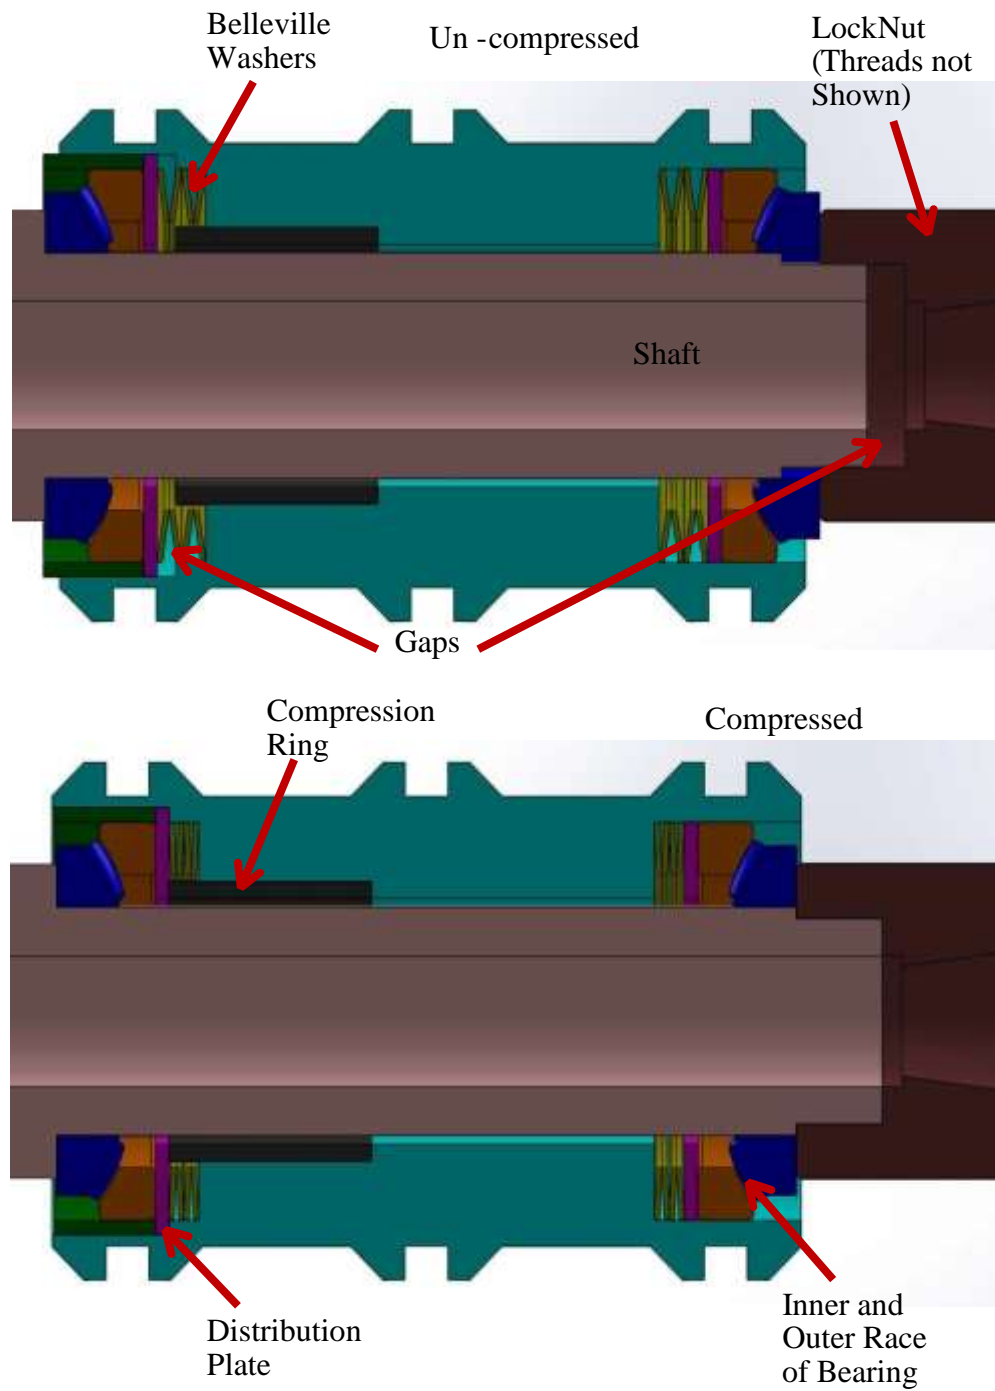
Original design of bearing assembly utilizing thrust bearings [25]
